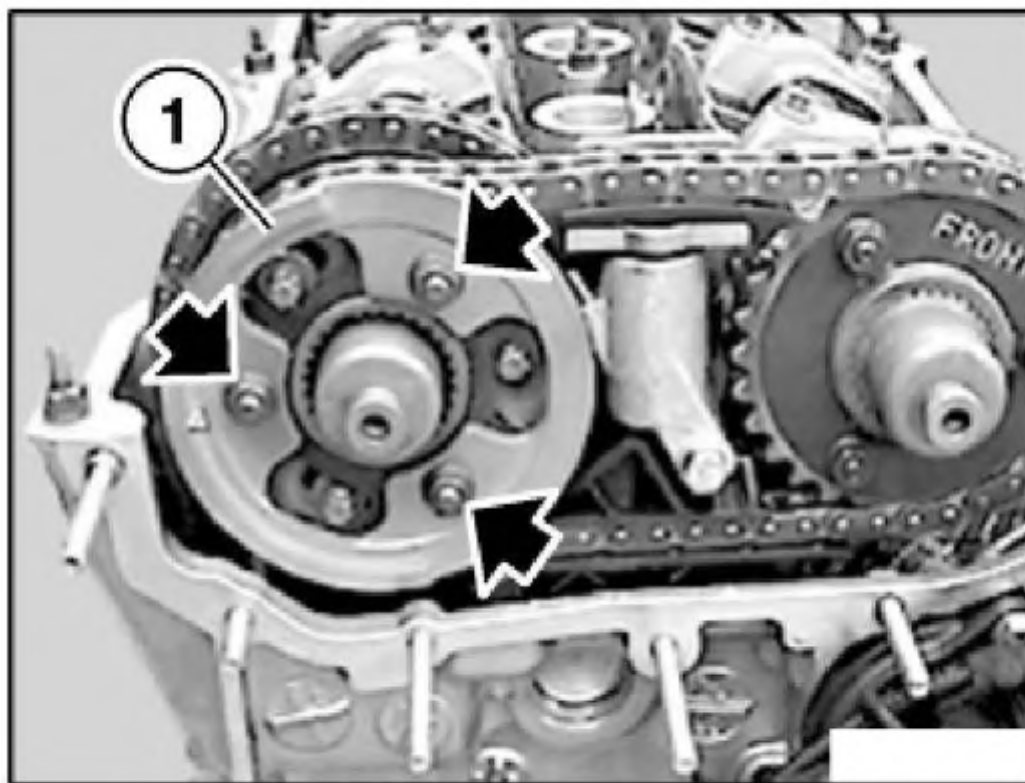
Locking Secondary Chain Tensioner With Special Tool
